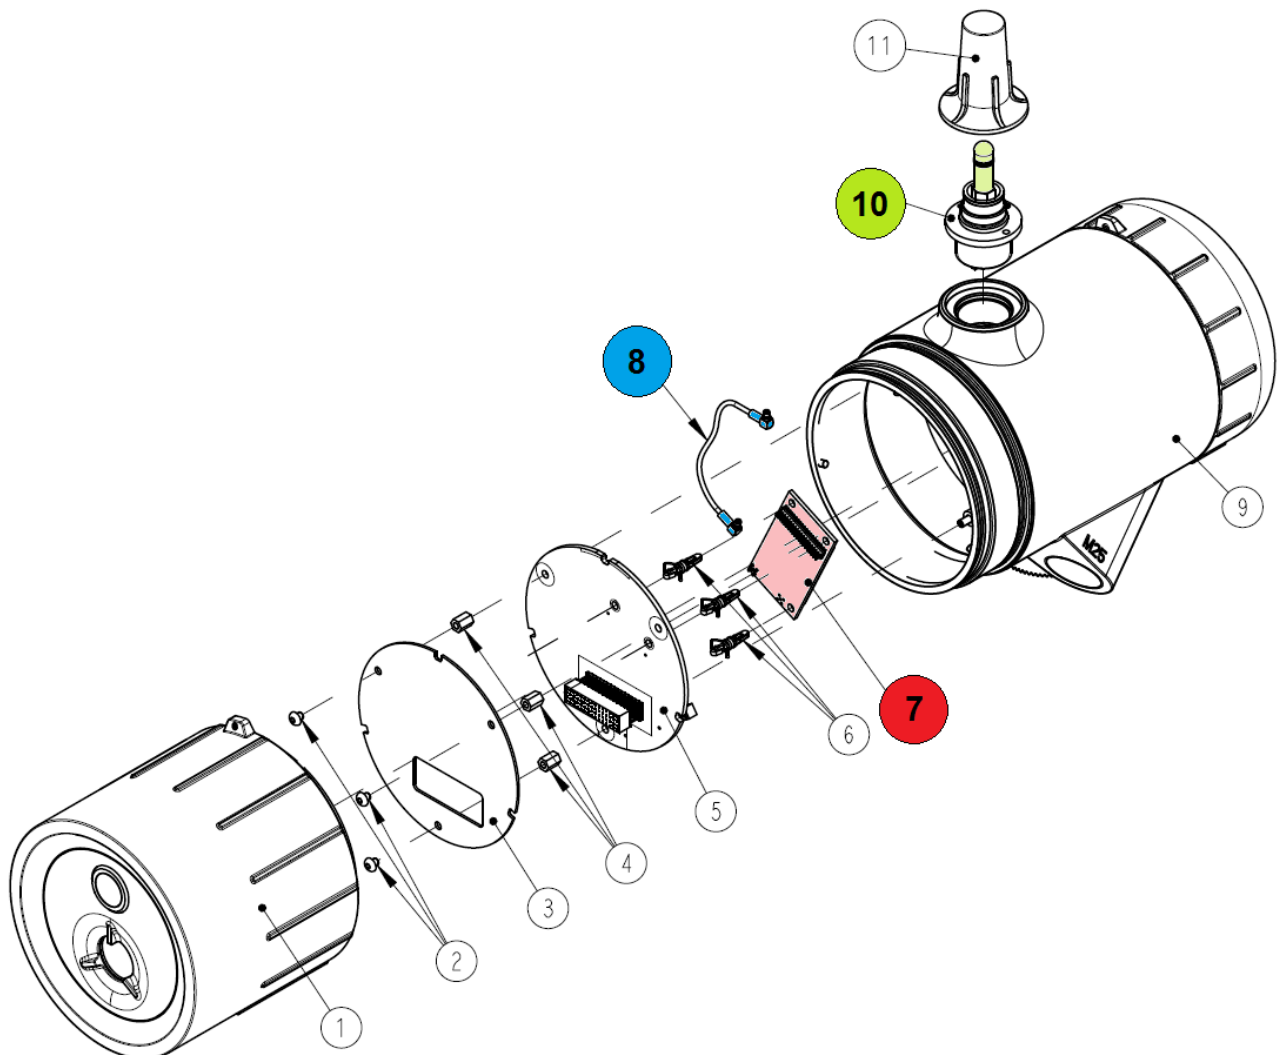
Example of typical integration of module. On the picture is one of the Search Platform Detectors - Searchzone Sonik assembly. Assembly of module is the same for all SPDs. 5 - PSU2 PCA, 6 – plastic standoffs, 7 - wireless module, 8 - antenna cable, 9 – Main body, 10 - antenna coupler with monopole antenna, 11 – Antenna cover
